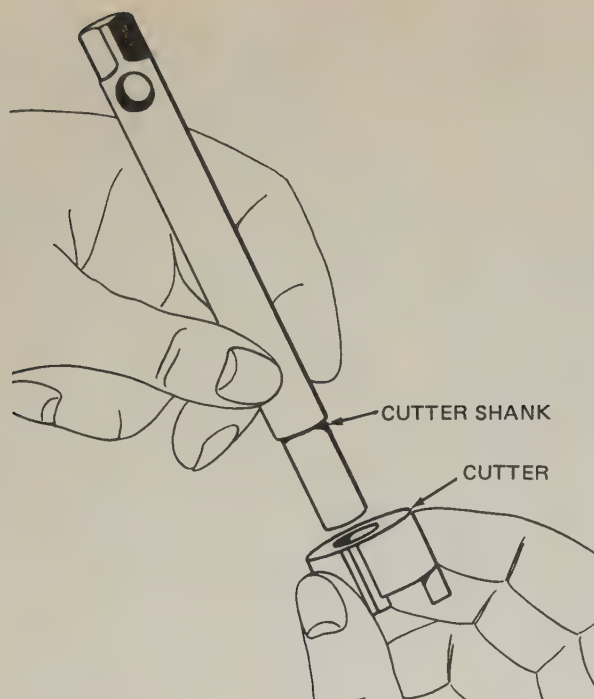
Inserting cutter shank in cutter. (Briggs & Stratton Corporation)
